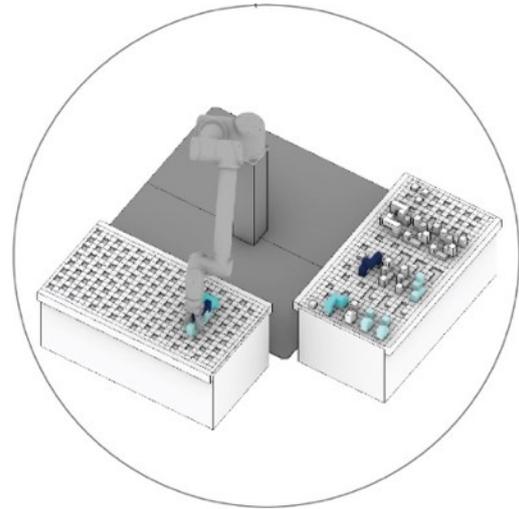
The robotic assembly setup. The left box is the area for the construction, and the right box the pick-up location.
